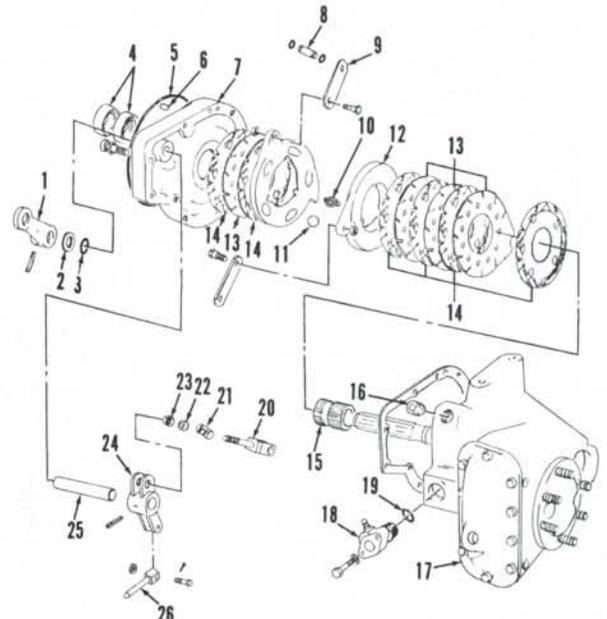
Exploded view of disc brake components used on 1490, 1494, 1594 and 1690 models.
